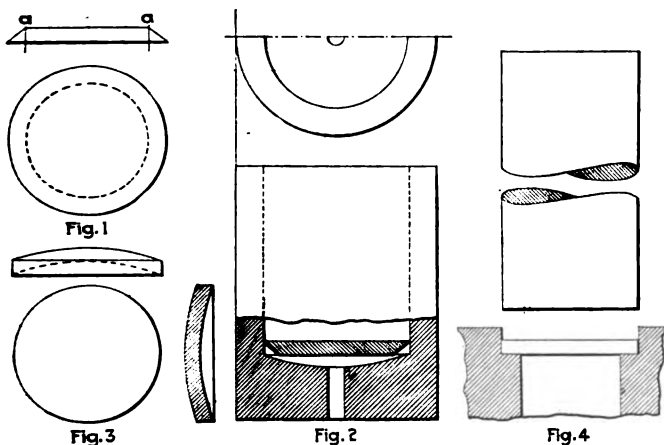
THE CORE PLUG. FIG. 2. FORMING DIE WITH CORE PLUG IN POSITION FOR FORMING. FIG. 3. CORE PLUG AFTER FORMING. FIG. 4. PASSAGE SEALED BY A CORE PLUG.
